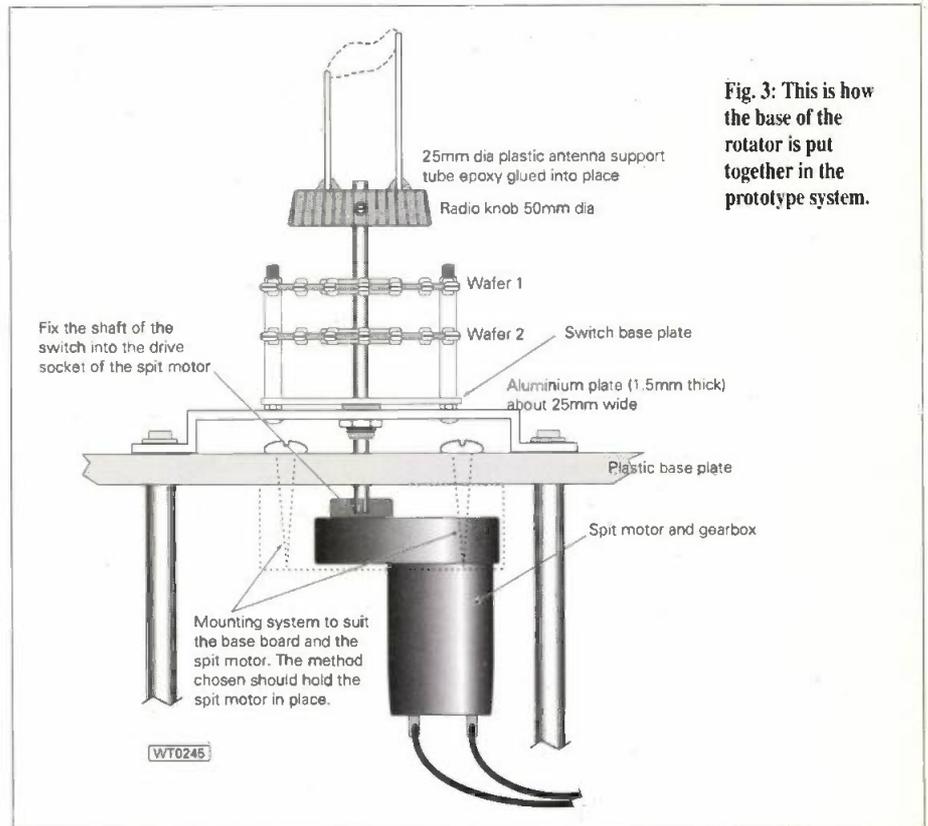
This is how the base of the rotator is put together in the prototype system.
